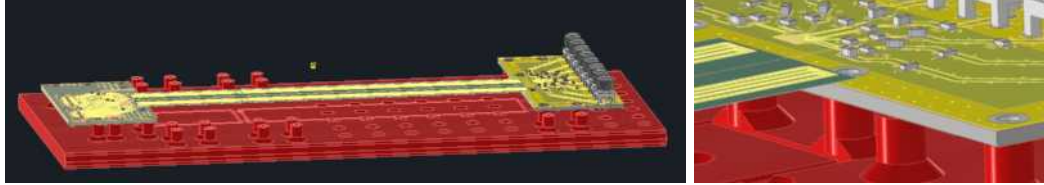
Pioneer PCB assembly mounted on test and shipping jig
